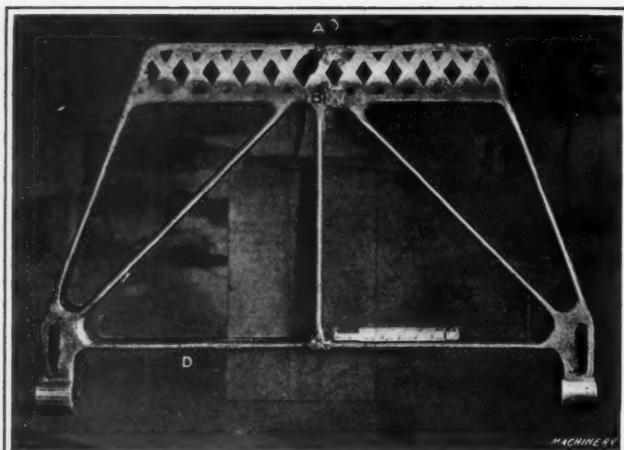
Foot-treadle illustrating Difficulties in Welding
